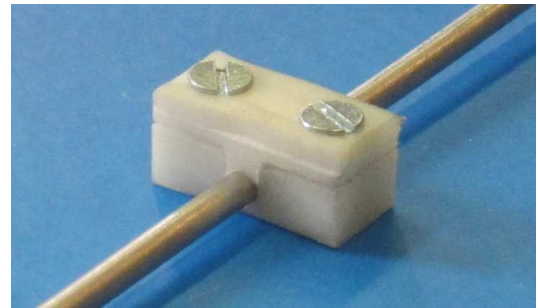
A prototype of the two part screw-clamp assembled with a cooling tube.
